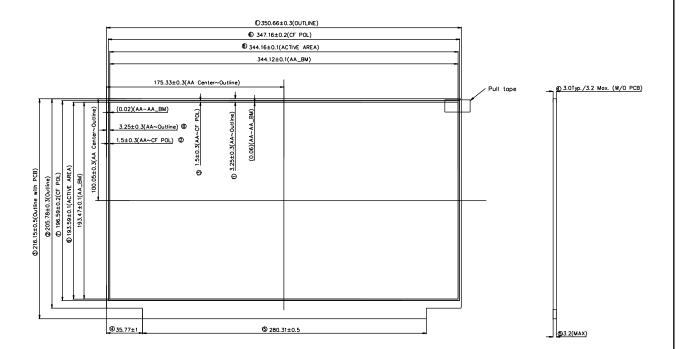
TFT-LCD Module Outline Dimension (Front View)
